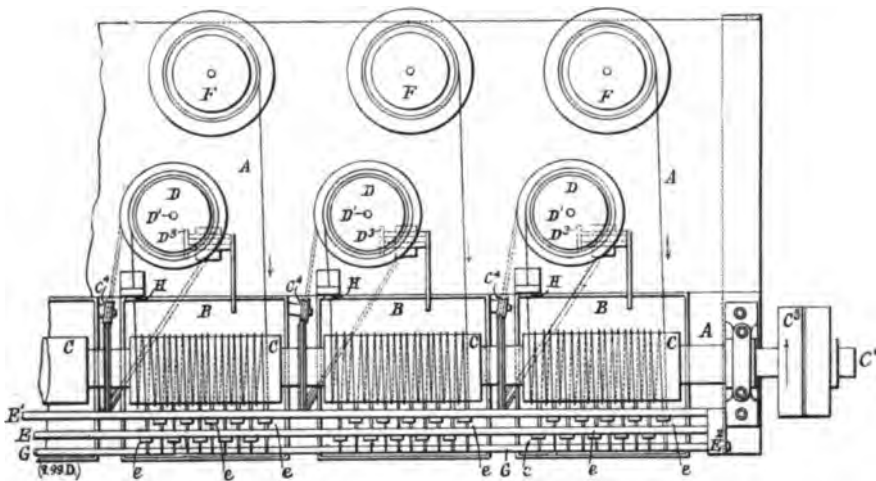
BOLTON'S CONTINUOUS WIRE MILL.
